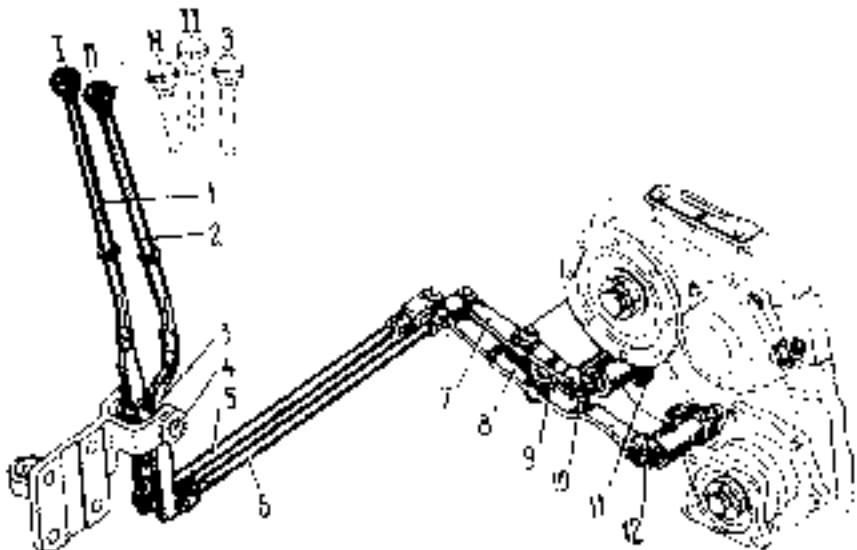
Distributor Box Control. 1 = differential selector lever; 2 = gear shift lever; 3 = pressure control lever; 4 = lever which 3 will move; 5 = controls, connected to 2; gear shift lock-out; 6 = shunt; 7 = distributor lever; alternator path switch; 8 = differential selector lever; 9 = differential lever; 10 = lever from gearbox; high gear engaged; 11 = lever which passes through; 12 = lever which passes through; 13 = low speed gear engaged.
